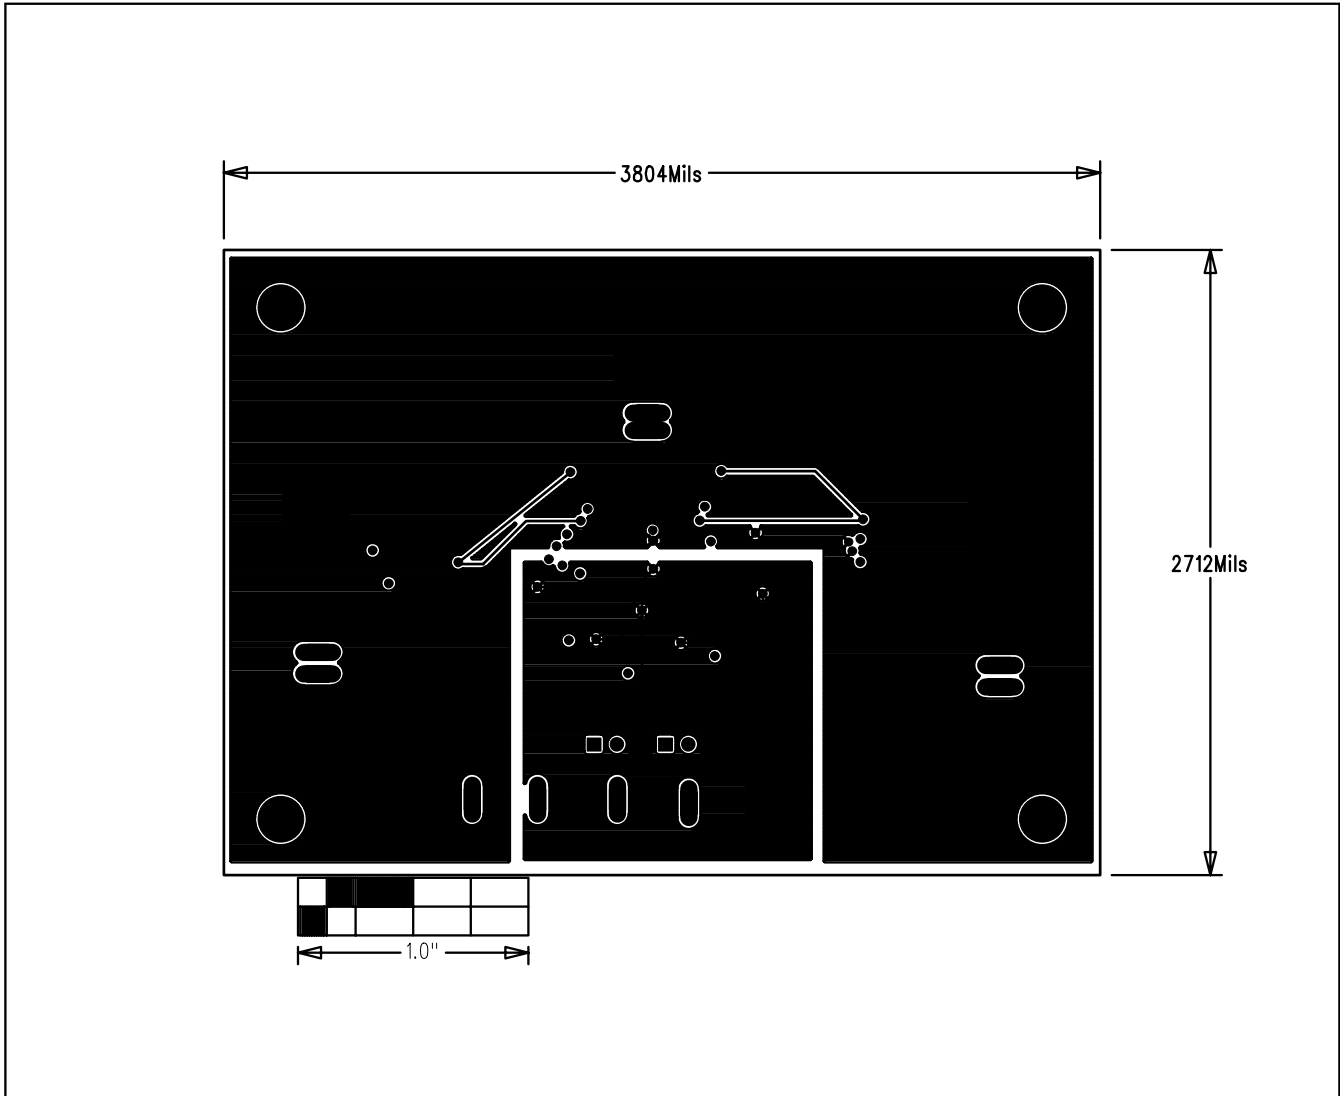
MAX8538 EV Kit PC Board Layout—Inner Layer 2
